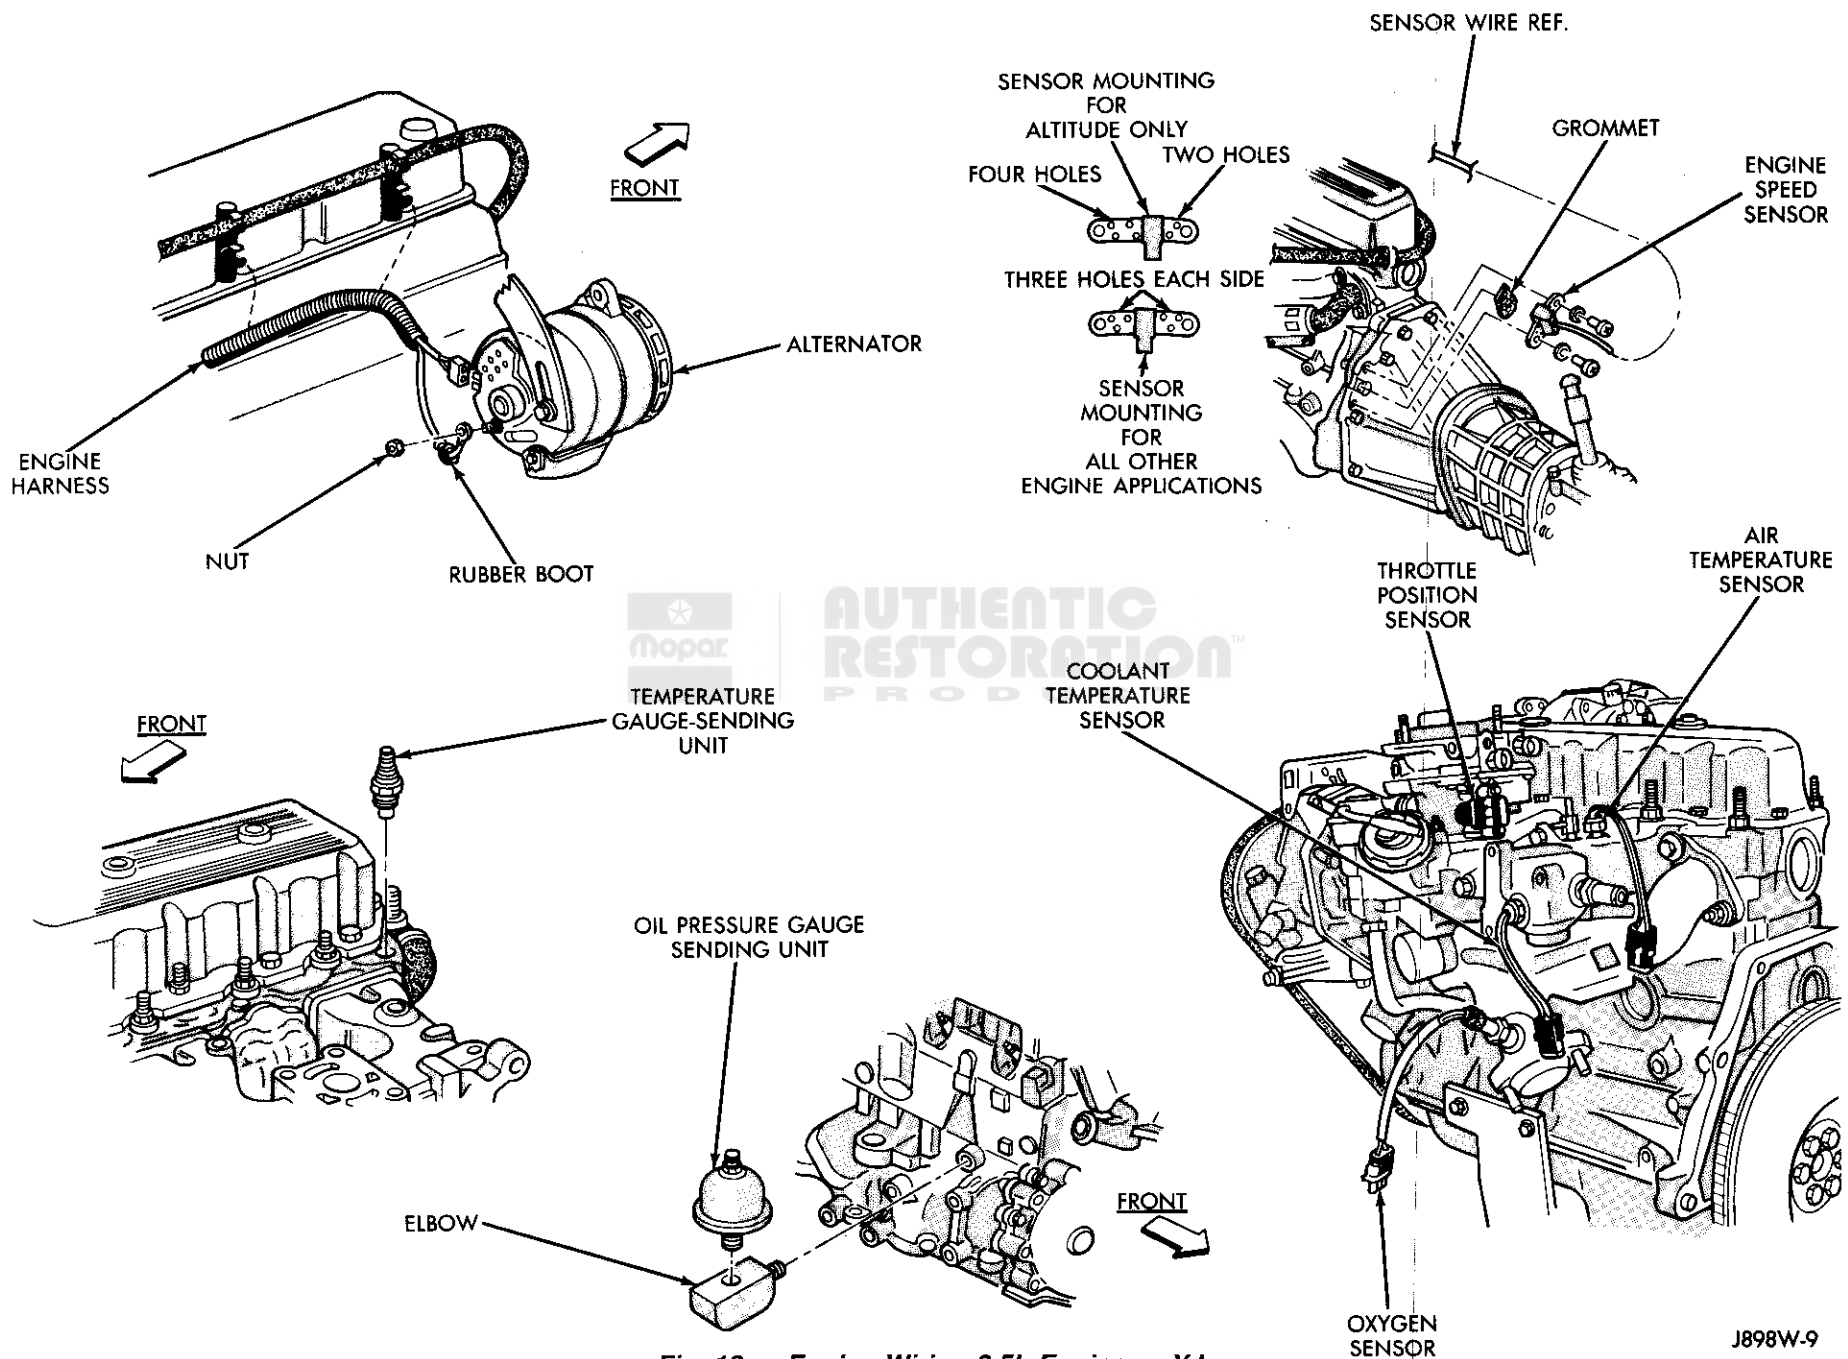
Engine Wiring 2.5L Engine — YJ
